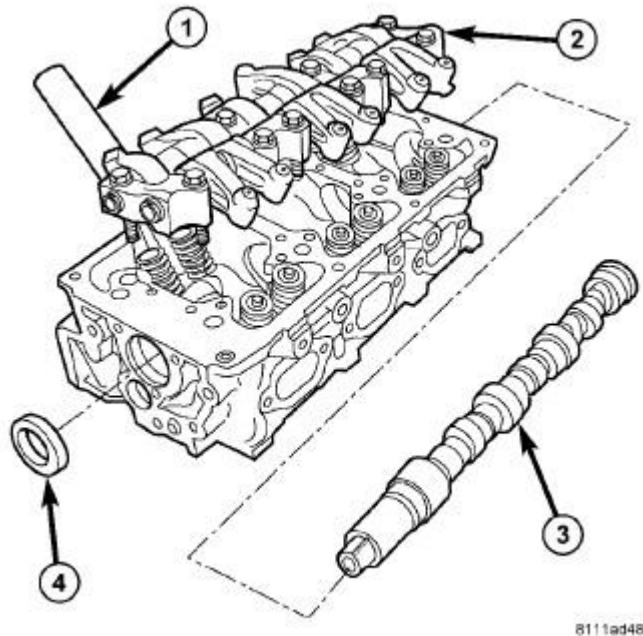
Camshaft, Rocker Arm Assembly & Cylinder Head
